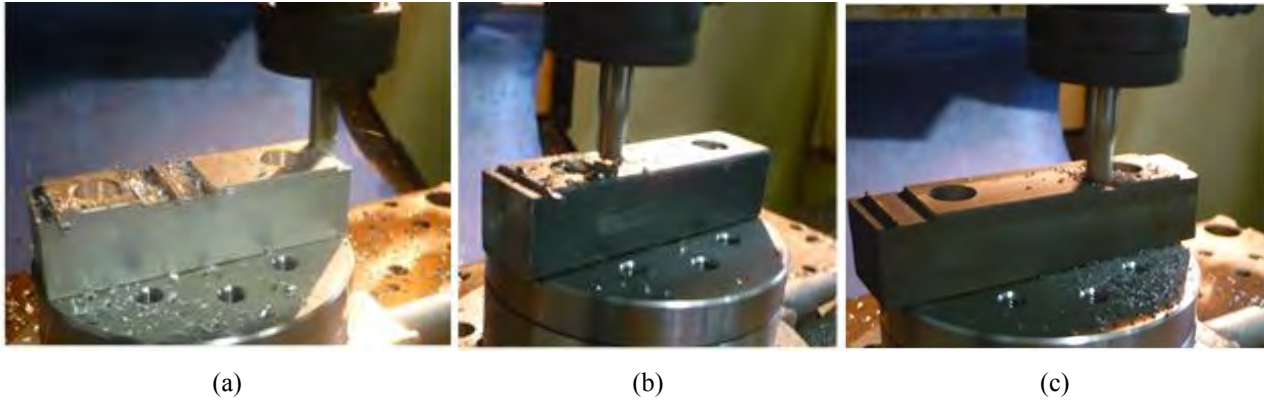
Workpieces during the end milling: (a) aluminum, (b) steel, (c) gray cast iron
